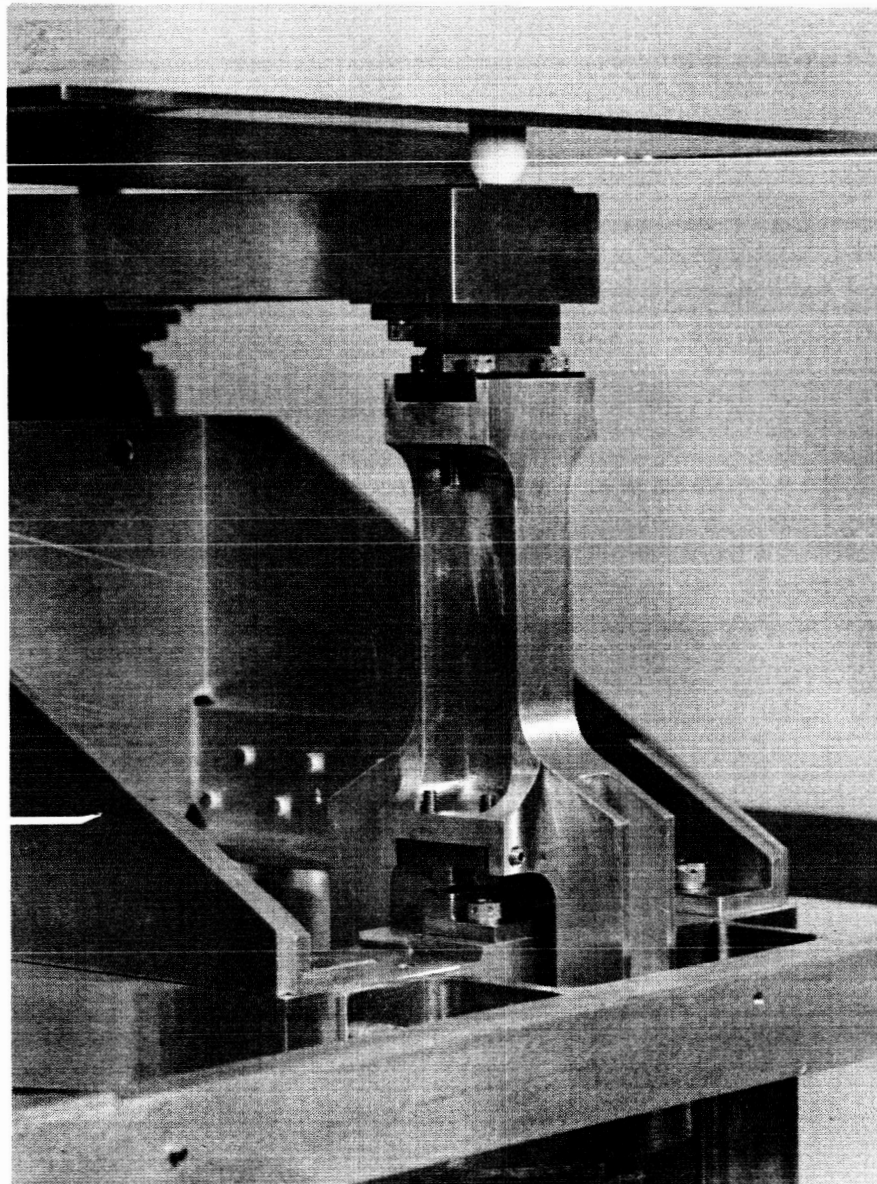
Knife edge bearings and bearing blocks for thrust stand platform.
